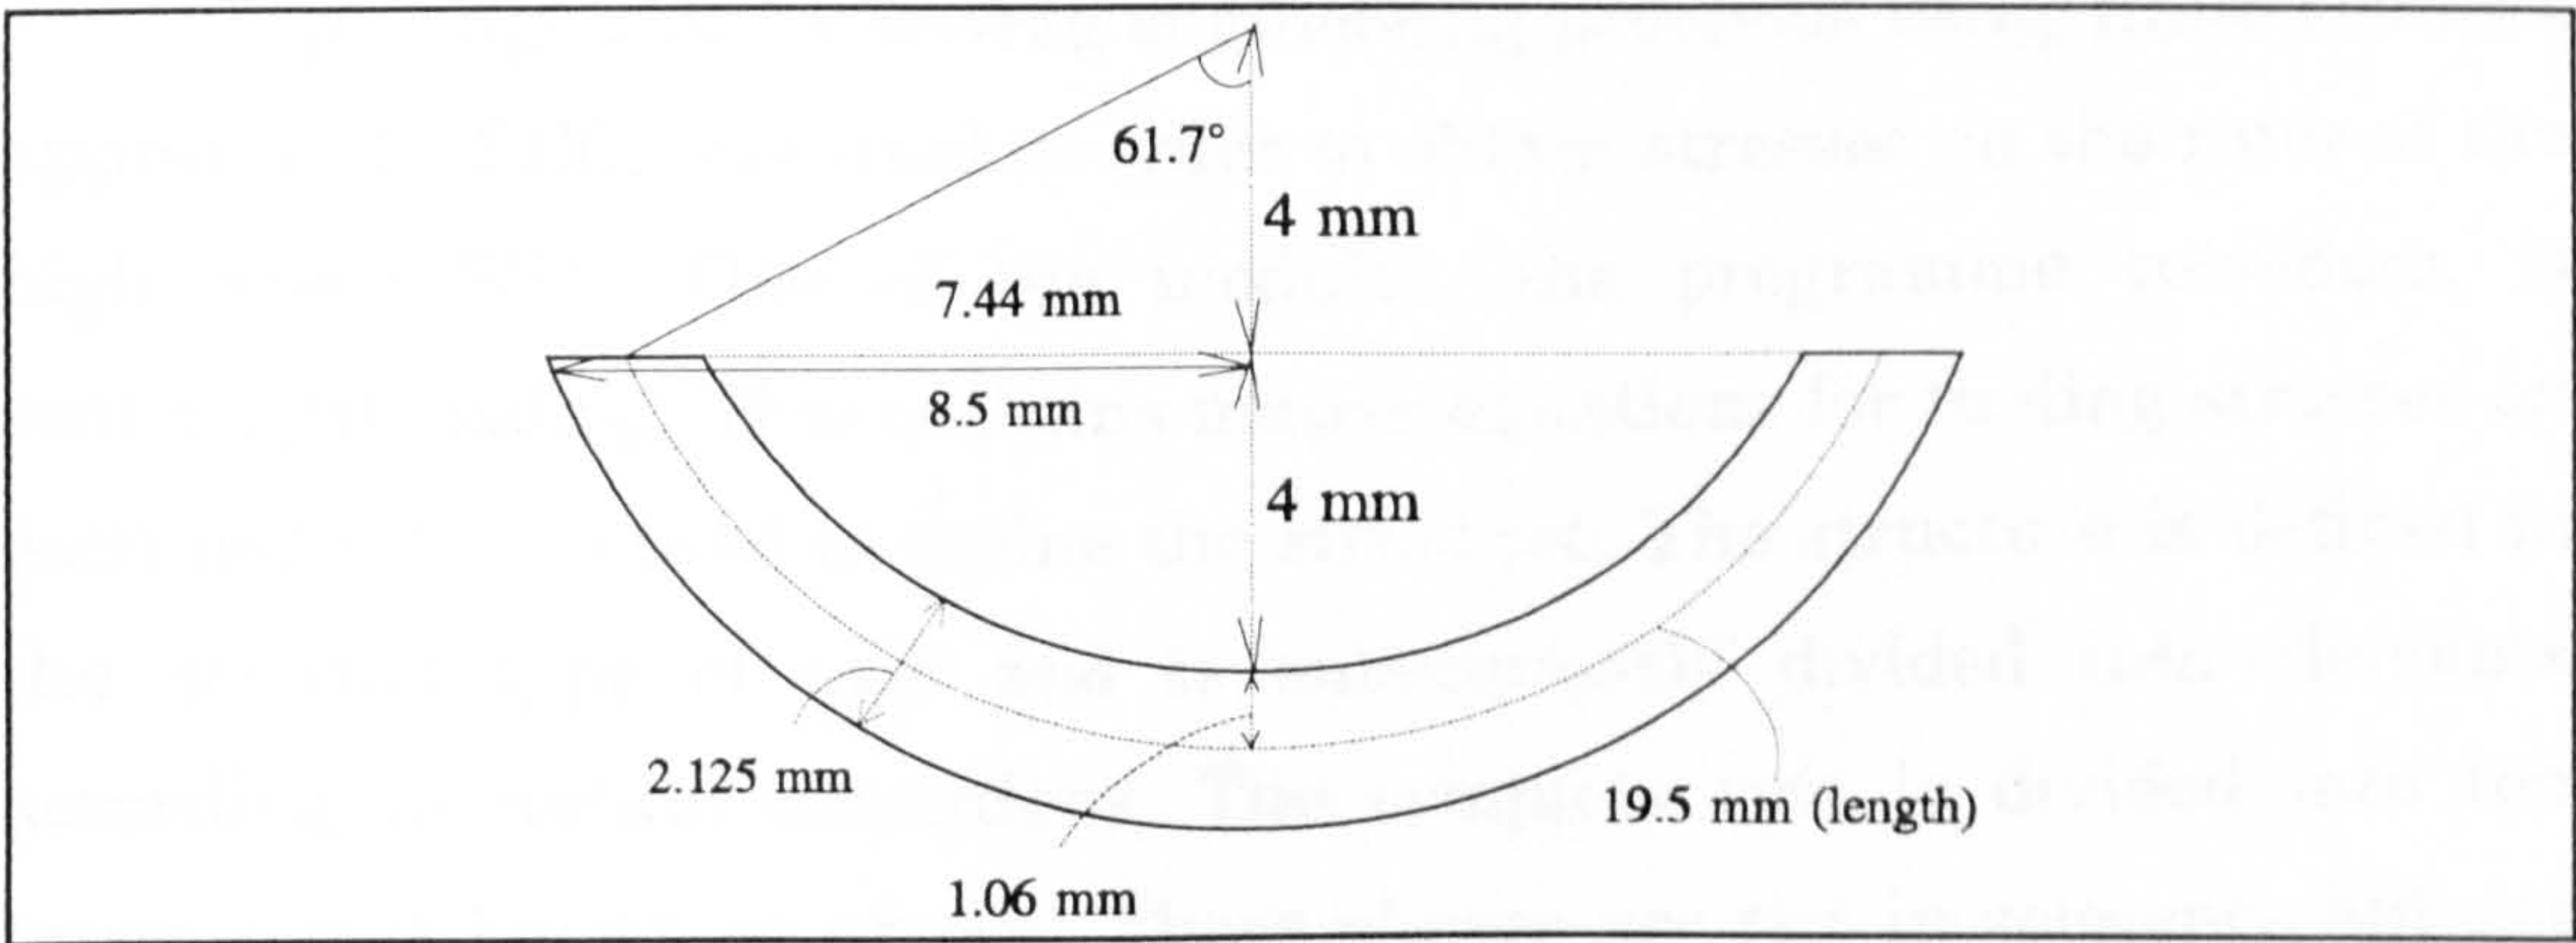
Geometry of the rotor strip assumed to be carrying the rotor flux.
